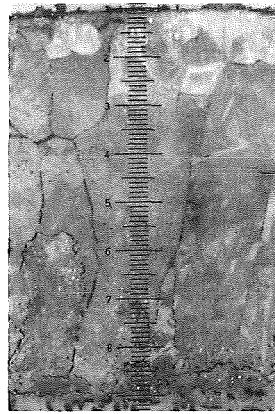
/5-3 : Cross Sections of Test ESSI-4/5
